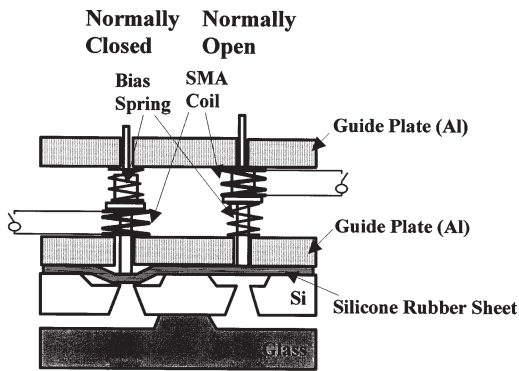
Structure of the microvalve using SMA coil and bias spring actuator [12]
